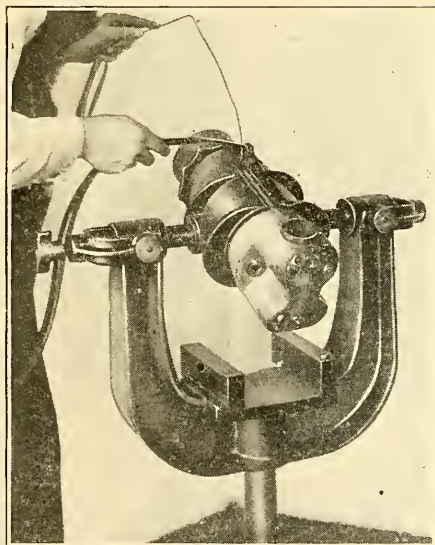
Tacking Jacket for Liberty Cylinder.
